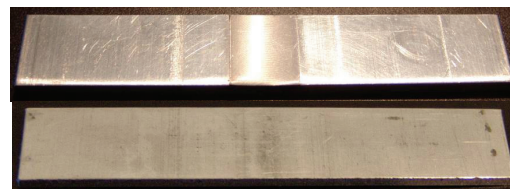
Visual inspection of FSW joints, front and back surfaces.
